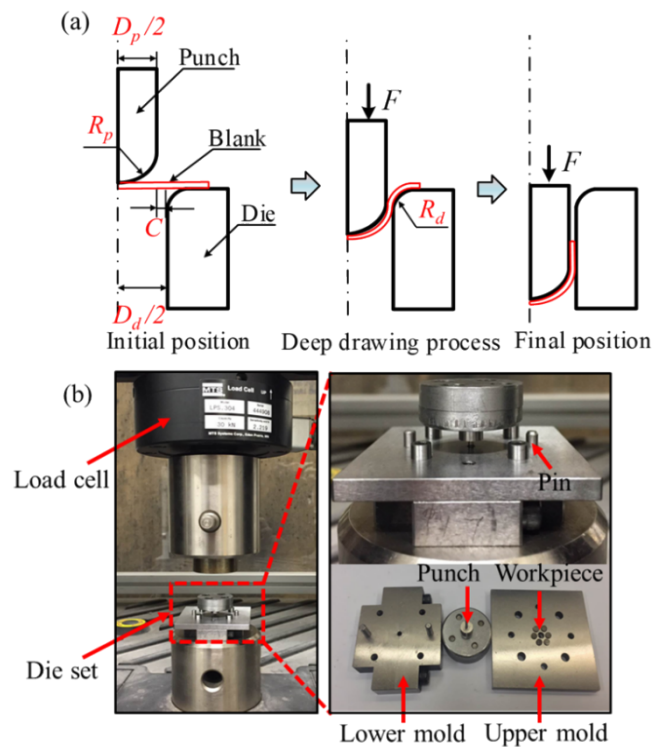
(a) Schematic of micro deep drawing process; (b) Testing platform and tooling set in micro deep drawing process.
